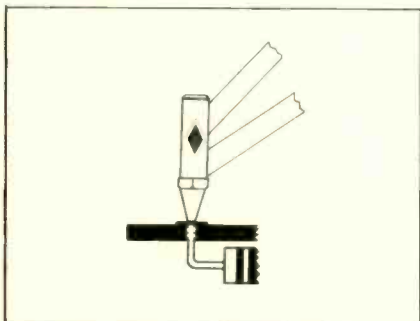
The hollow tip of the soldering iron is placed over the lead to be desoldered.
